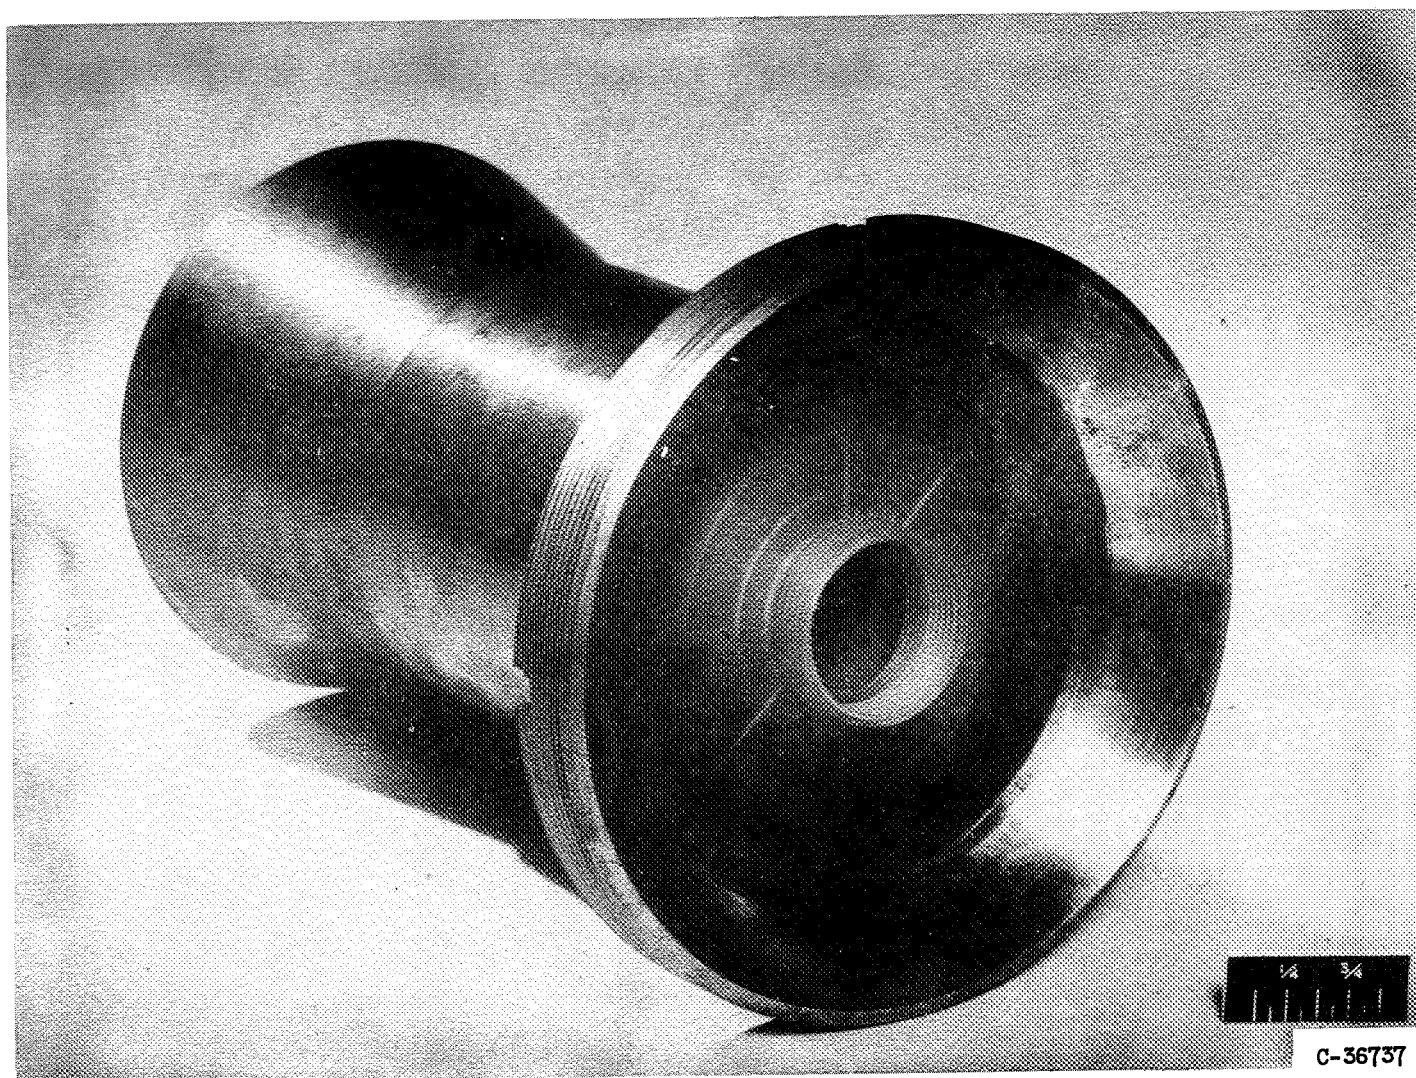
Nozzle closure and igniter mount for air-launched T-40 rocket firings.
